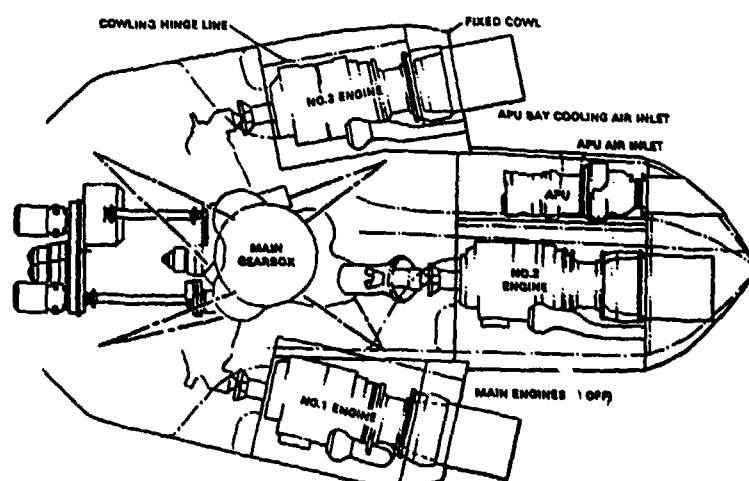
EH101 DRIVE SYSTEM LAYOUT
